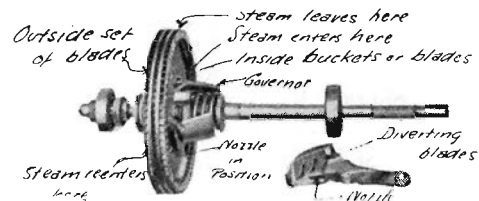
Turbine Wheel Shaft, Bearings, and Nozzle
